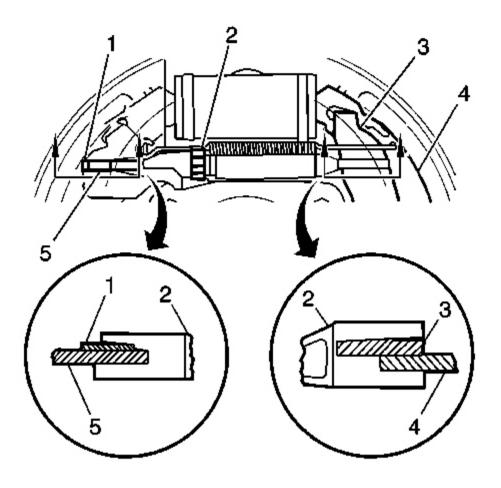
Locating Adjuster Actuator Components Courtesy of GENERAL MOTORS CORP.
